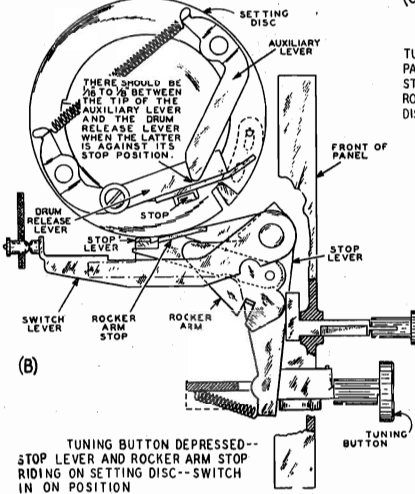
Setting Disc—On Position, Stop Lever on Edge of Disc
